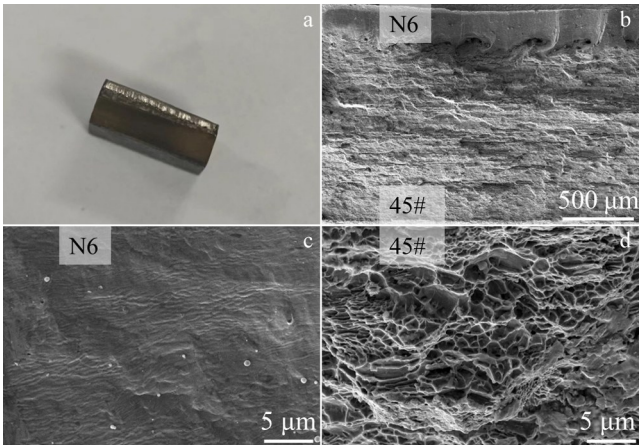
Shear fracture morphologies: (a) macroscopic morphology, (b) interface, (c) N6 side, and (d) steel 45# side
